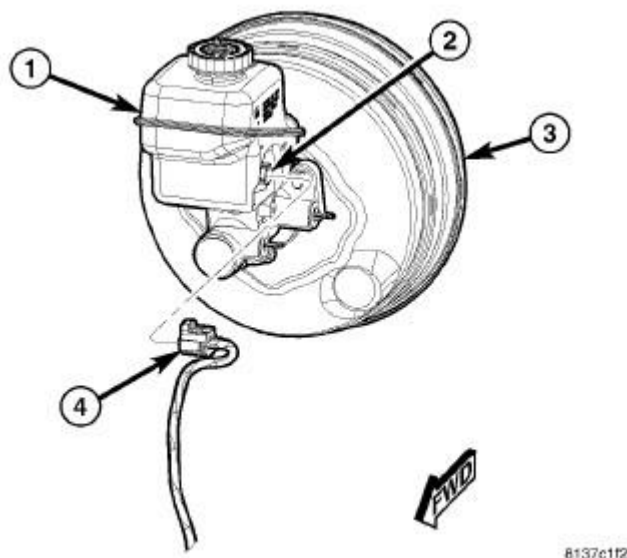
BRAKE FLUID LEVEL SENSOR CONNECTION
